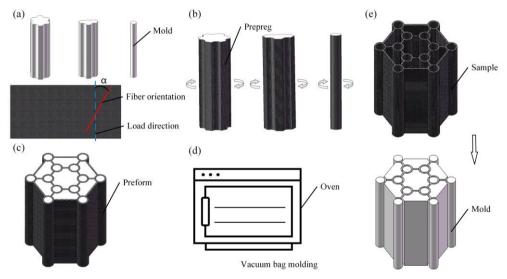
Manufacturing processes of biomimetic multi-cell tube: (a) Preparation of mold and prepreg strips, (b) Wrapping of prepreg, (c) Mold assembly, (d) Curing, (e) Demold
